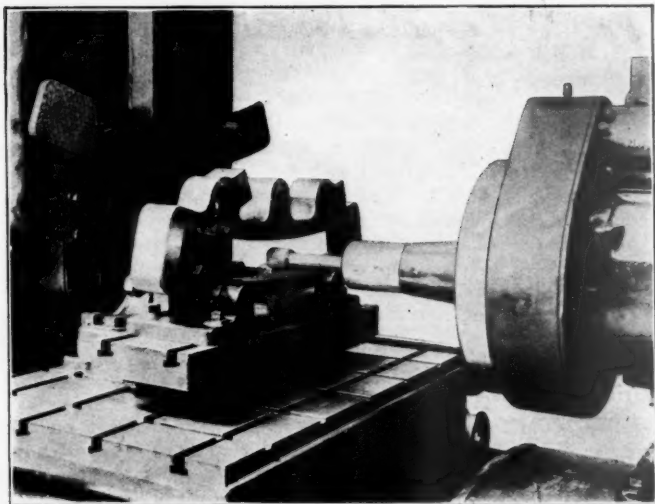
Grinding a radius link on the Churchill No. 2 machine.
